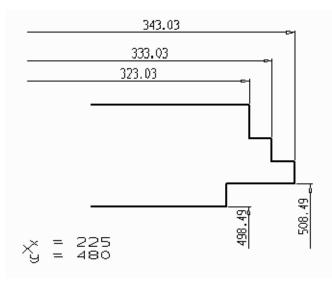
The Datum Offset Dimension Creation Tools
